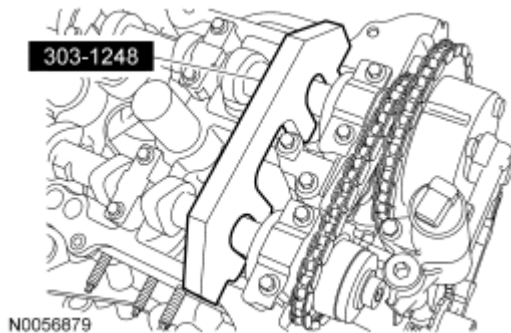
Installing Special Tool (303-1248) Onto Flats Of RH Camshafts
